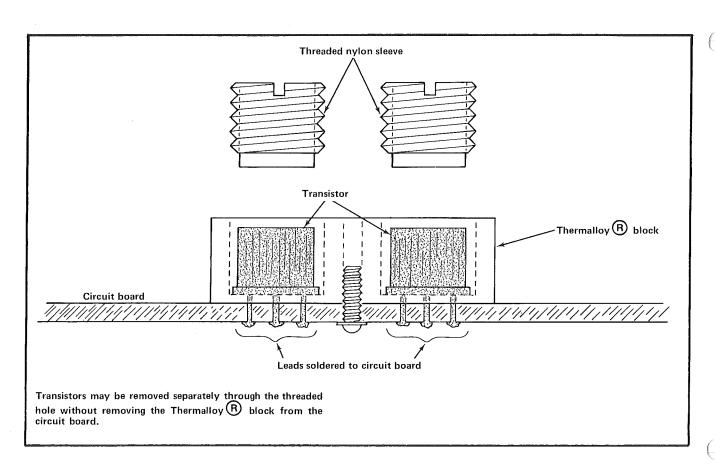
Q70-Q75 Heat-Sink Temperature Equalizer Assembly,
